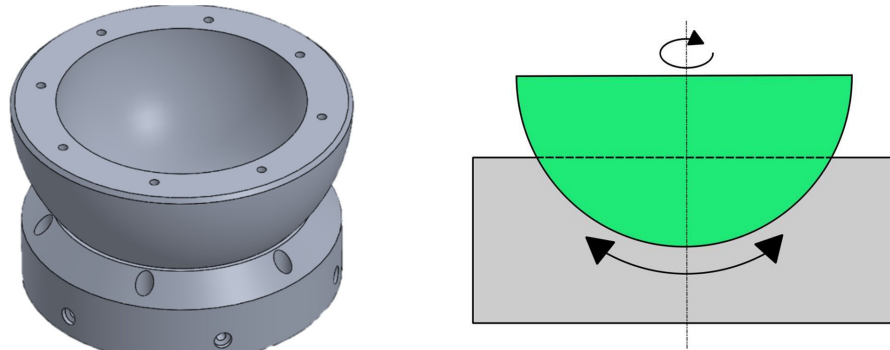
Spherical air bearing (left) and globular air bearing: degrees of freedom (right)
